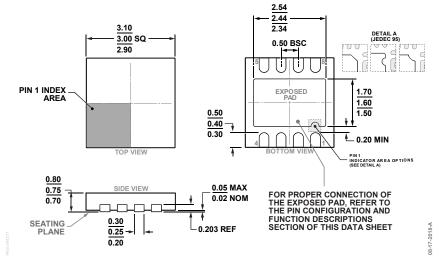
8-Lead Lead Frame Chip Scale Package [LFCSP] 3 mm × 3 mm Body and 0.75 mm Package Height (CP-8-21)
